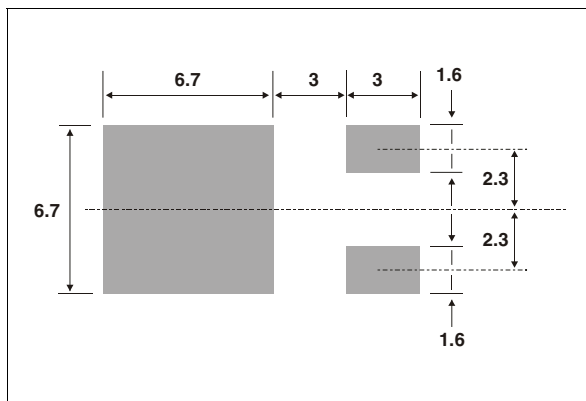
DPAK Foot Print Dimensions (in millimeters)
